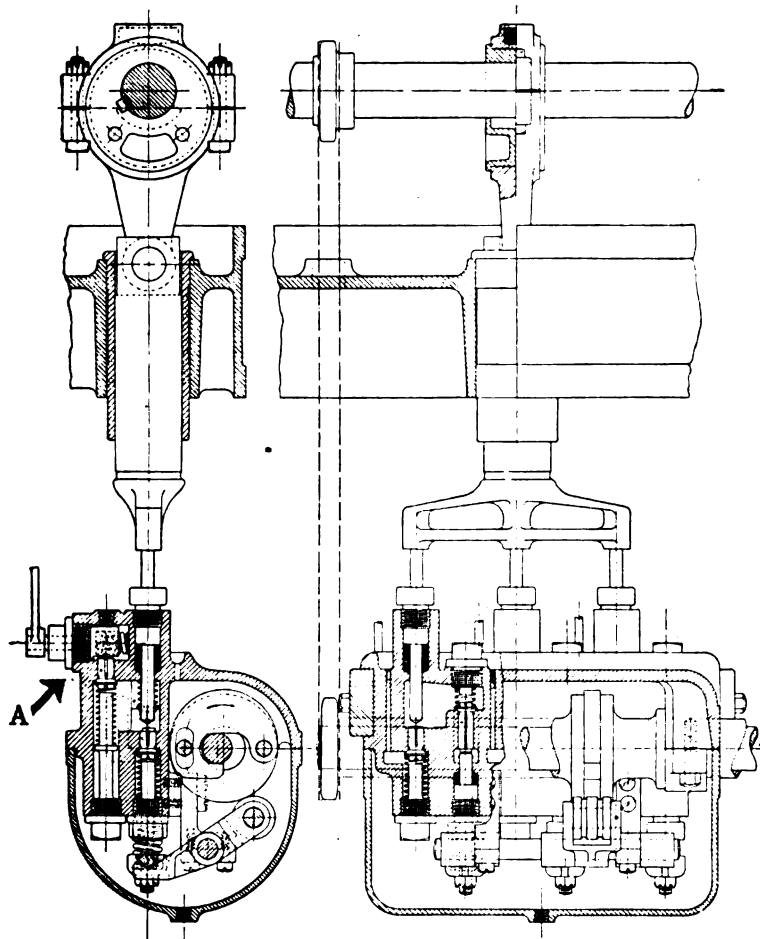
SECTIONAL VIEW OF THE FUEL PUMP FOR THE 3-CYLINDER FULTON DIESEL ENGINE HAVING A DISPLACEMENT PLUNGER FOR EACH WORKING CYLINDER
